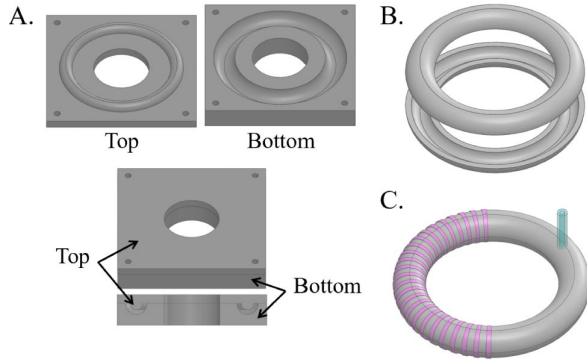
Fabrication steps for T_β . (A) Additively manufactured negative molds for casting silicone. (B) Two torus halves to be glued together. (C) Inserted silicone inlet tube and wrapped strain-limiting string (pink).
